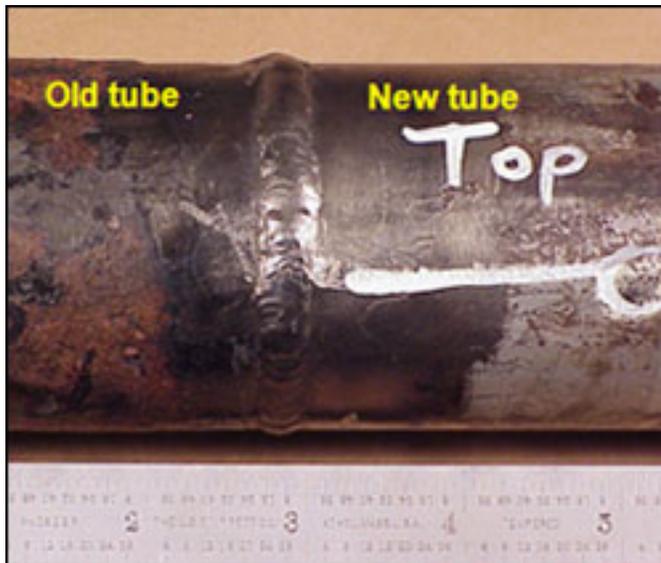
Single weld bead on the OD of the top portion of the tube sample).
